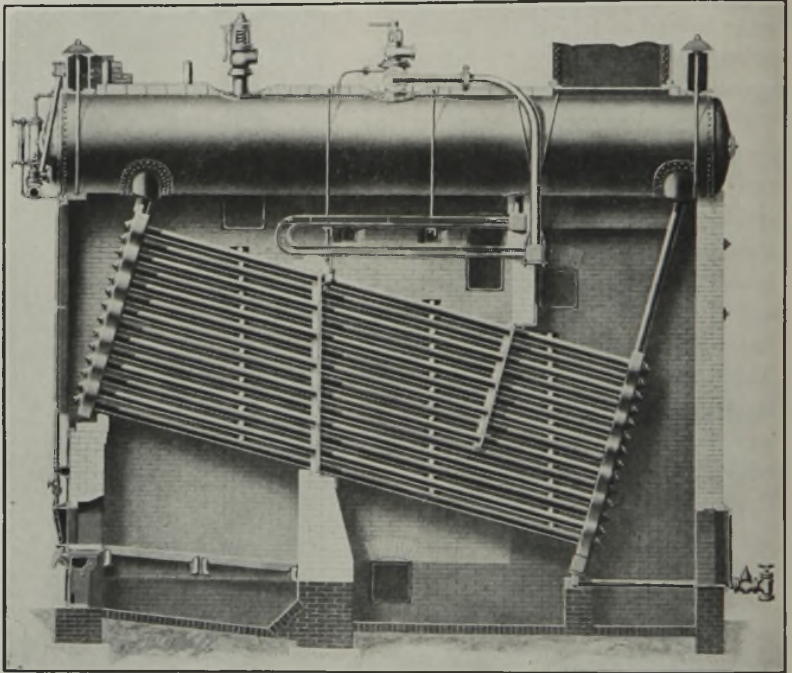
Babcock and Wilcox wrought-steel inclined-header longitudinal-drum boiler with Babcock and Wilcox superheater, and arranged for hand firing.
